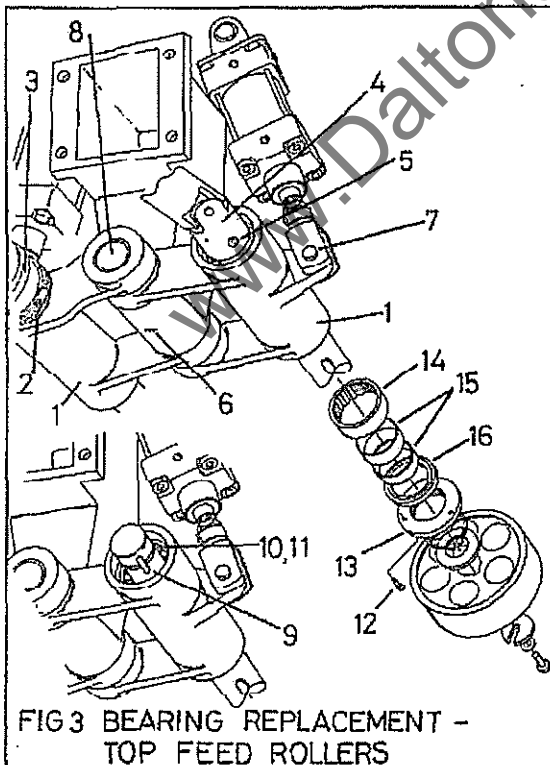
BEARING REPLACEMENT - TOP FEED ROLLERS
